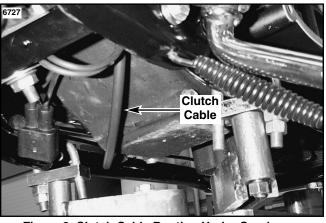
Clutch Cable Routing Under Crankcase (Shown From Left Side Under Jiffy Stand)
